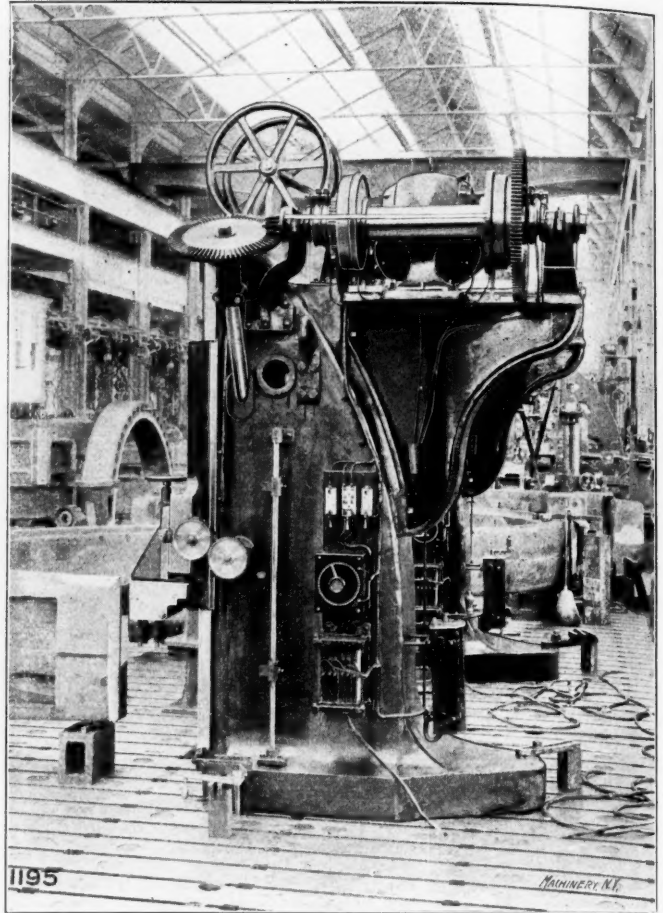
Side View of Worm-and-rack Driven Slotter, showing Motor Drive and Magnetic Clutches.
